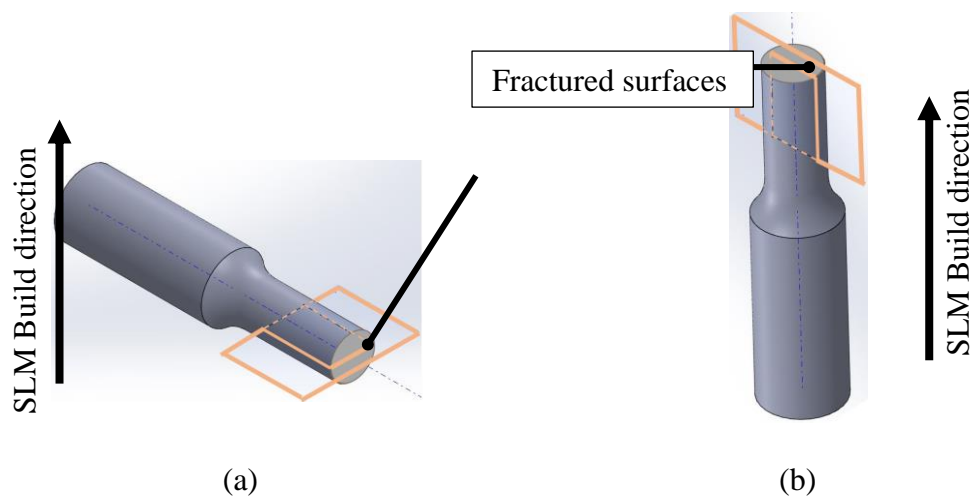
Longitudinal sectioning through the fractured surfaces of a) MH and b) MV samples.
